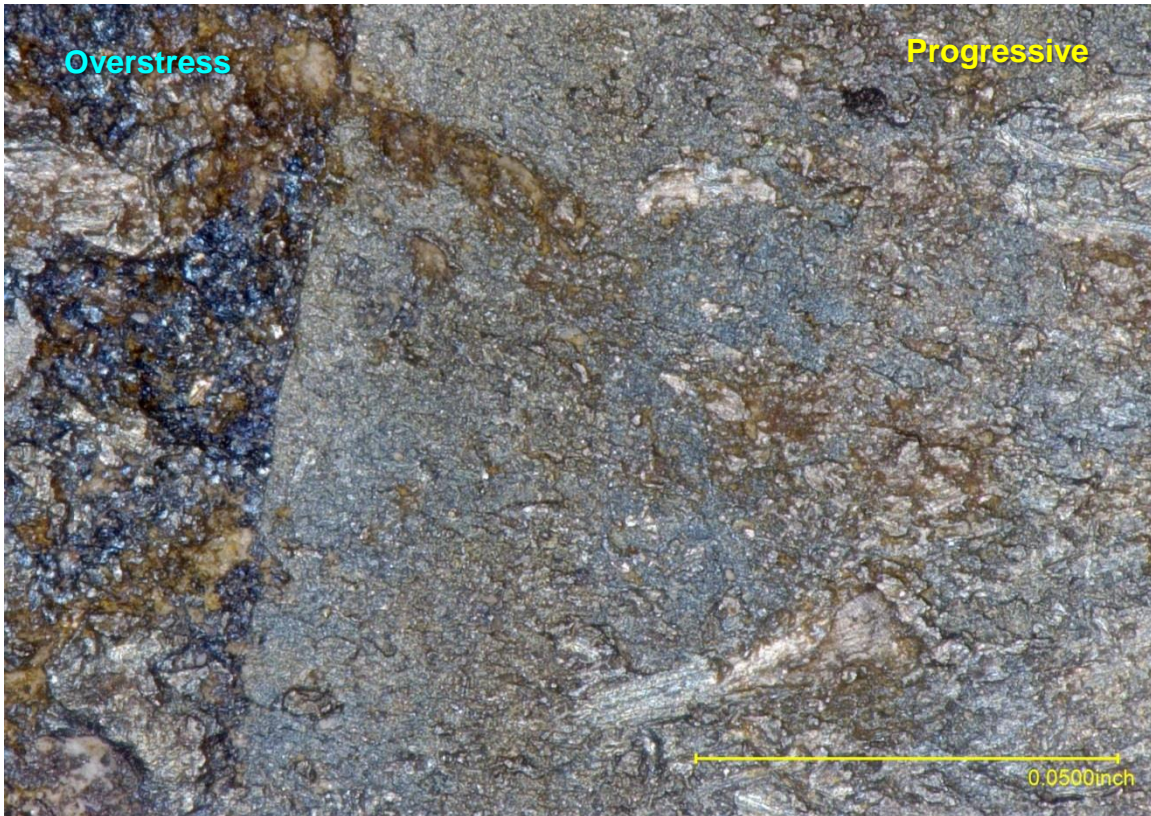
Edge of the progressive crack on the axle fracture surface.
